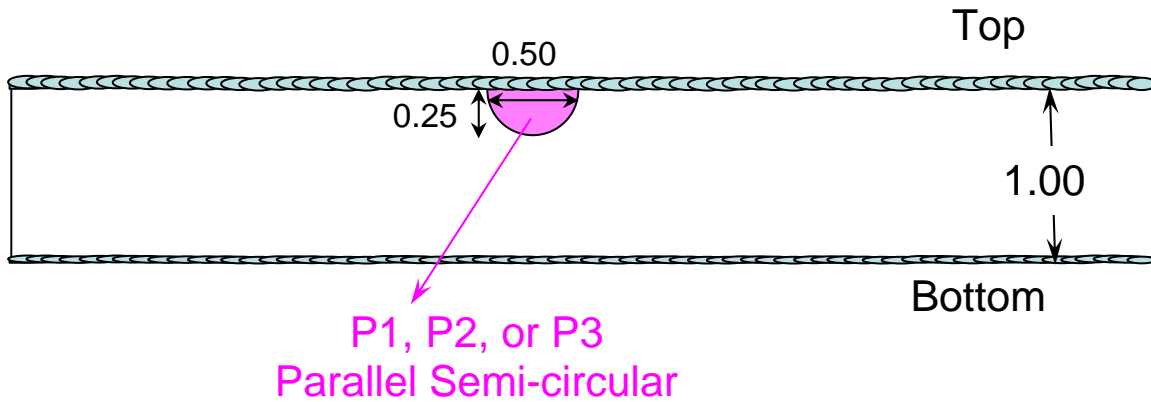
Semi-circular surface cracks parallel to the weld (P1, P2, and P3).
